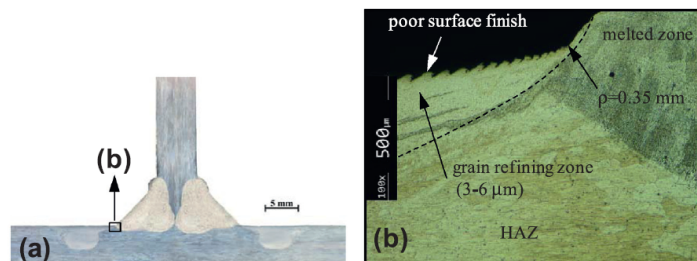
Cross section metallographic analysis of a post processed MIG weld using tool A (ρ = 0.5 mm): (a) panoramic view and (b) post-processed weld toe.
